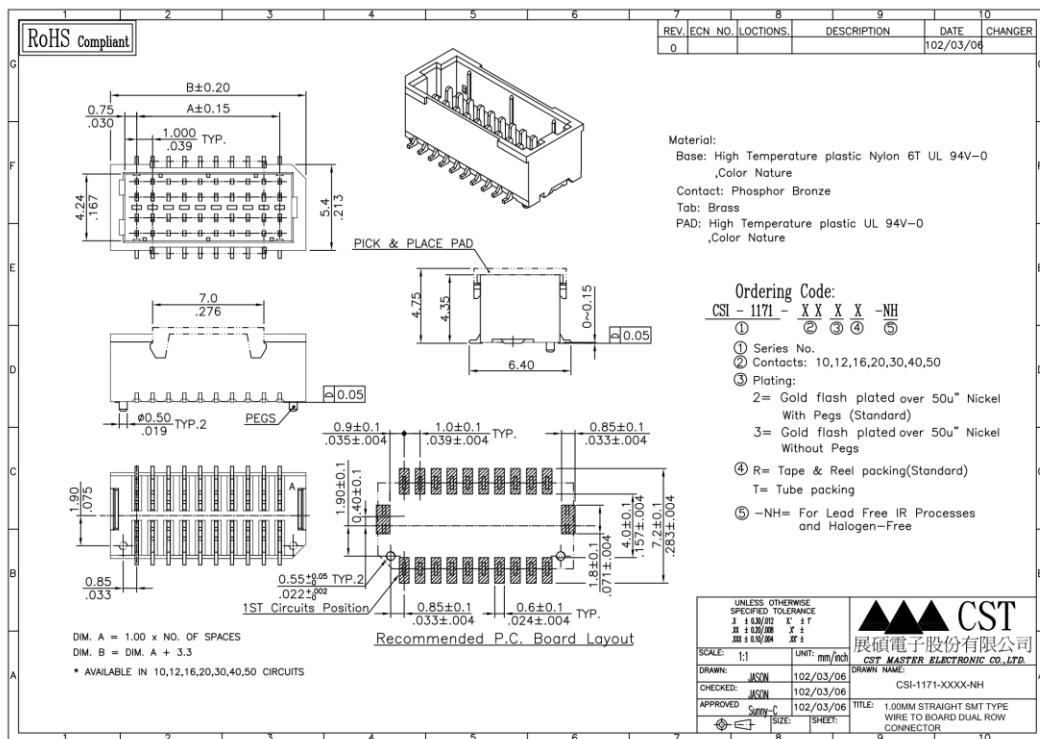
Wire to Board SMD 2*10P 180D Connector Drawing (CN3/CN4)
